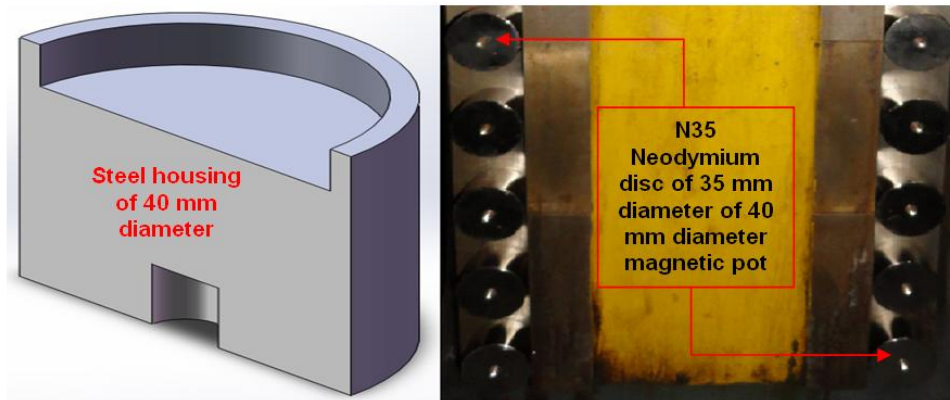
Steel housing of 40 mm diameter of magnetic pot of 35 mm diameter used for linear slide to machine assembly
